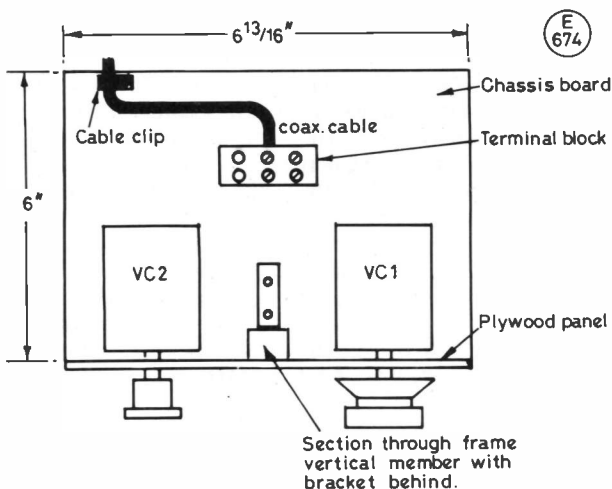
TOP VIEW OF CHASSIS ASSEMBLY WITH MAJOR COMPONENTS MOUNTED.
